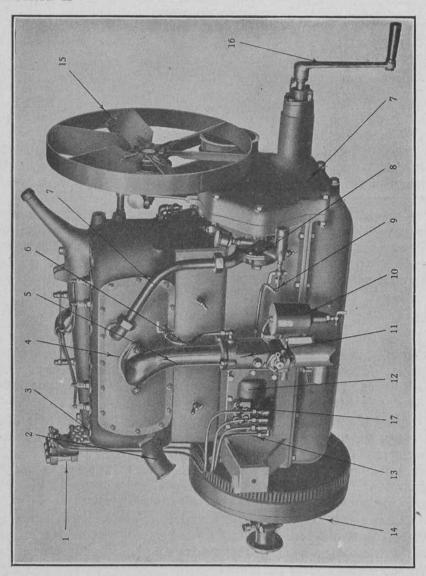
RIGHT SIDE OF ENGINE	No. Part No. Name 00350 GF Oil sight feed. 10714 GF Exhaust pipe flange elbow. 0032734 GEC Valve port plug. 0071 BGED Carbureter intake pipe. 00776 YED Carbureter water jacket line. 00776 TED Carbureter water jacket line. 00335 GEC Water inlet pipe to cylinder. 325 GE Water pump. Carbureter water jacket line.	SAB SAB SAB SAB SAB SAB SAB SAB SAB SAB
